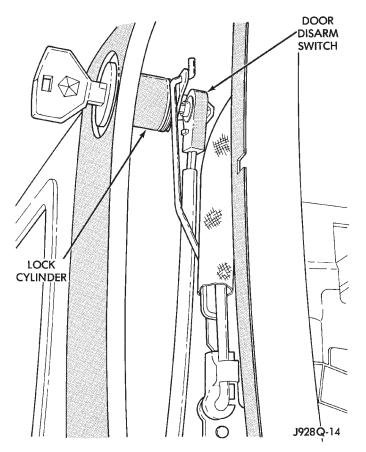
Door Lock Cylinder Switch Remove/Install-Typical
